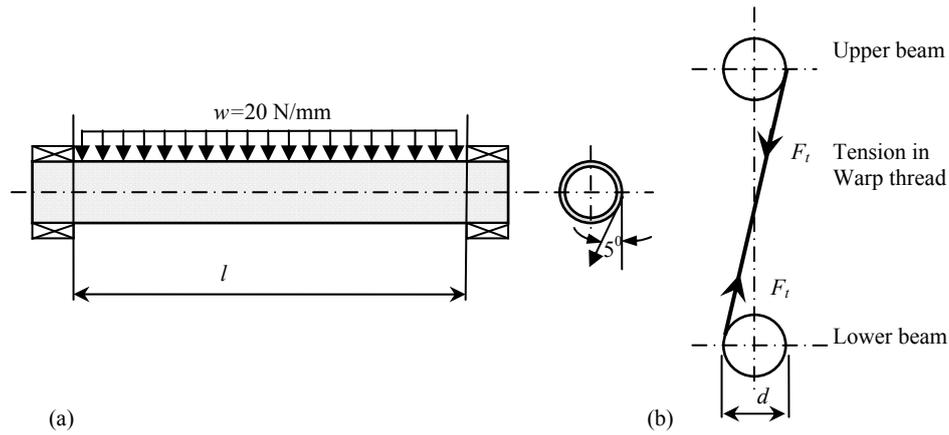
(a) Warp thread load diagram on beam, (b) Warp thread tension
